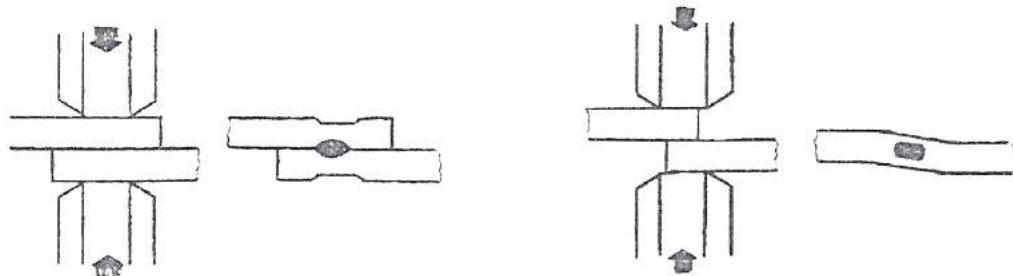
(a) Lap seam welding (b) Mash seam welding
